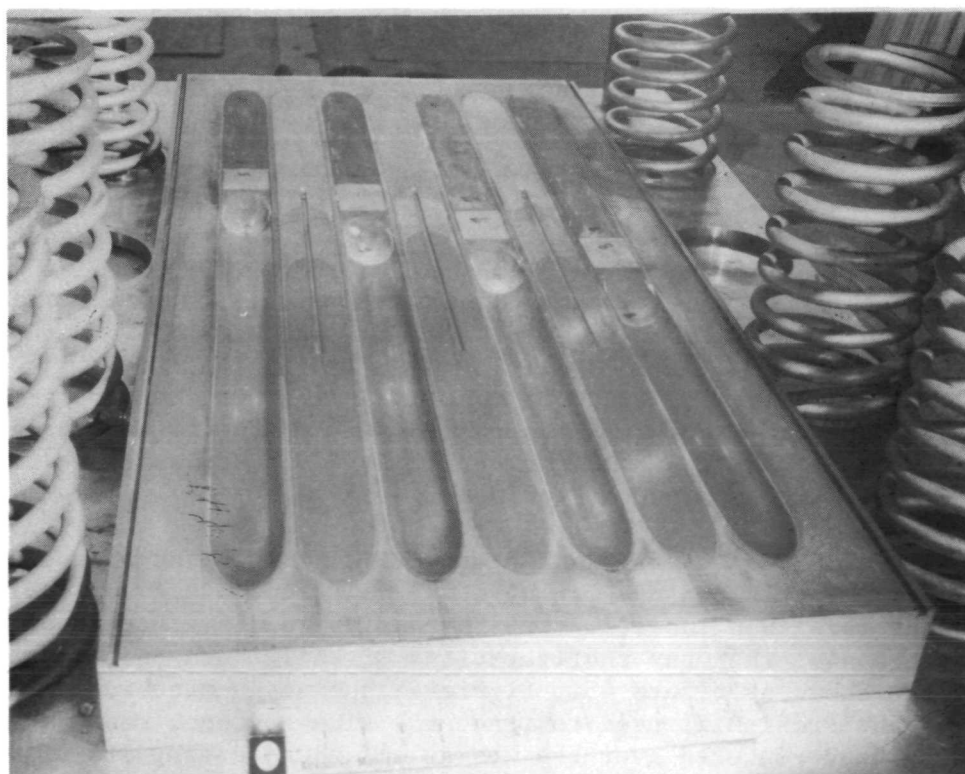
Plastic Inserts Installed to Form Different Length Beads
